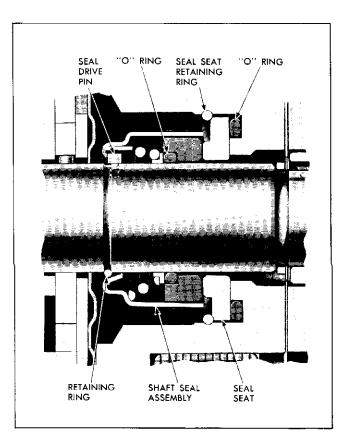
Cross Section of Compressor at Shaft Seal Area
